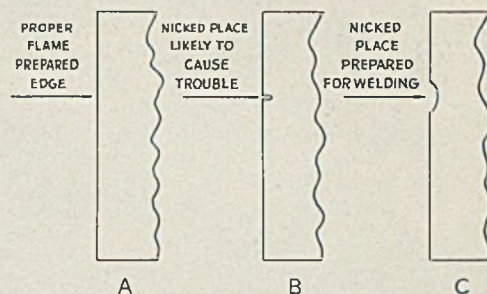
This illustrates a properly prepared flame-cut edge and also how to remove a nick in preparation for welding
